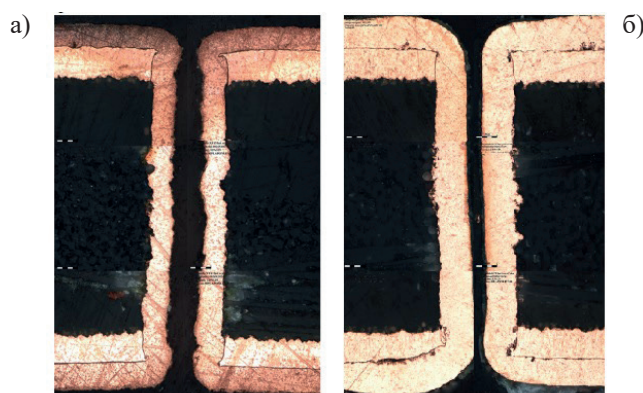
Photography (x2000) of transverse section of PCB with a hole  $\varnothing$  0,8 mm with copper coating deposited from:
